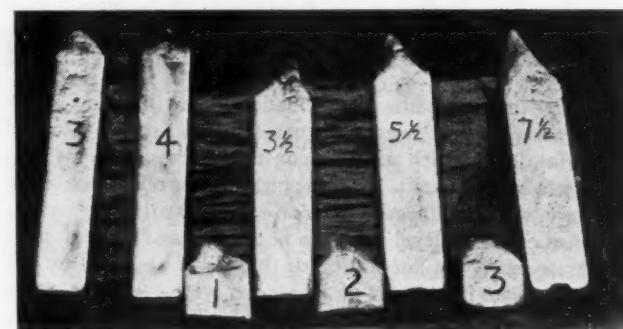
INGOTS REMOVED FROM FURNACE BEFORE REACHING THE COMPLETELY MOLTEN STATE
